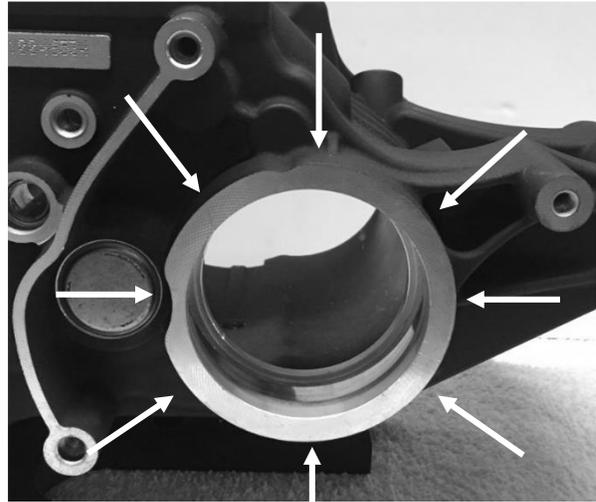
| APPLY HEAT AROUND THE MAIN DRIVE GEAR BEARING BOSS AREA
